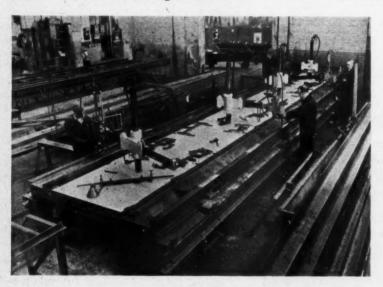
A general view of the drilling rig for railway van frames with Consolidated Pneumatic type 327 drills mounted on sliding radial arms
